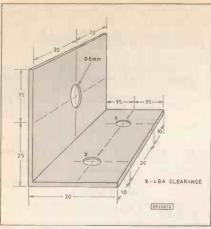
Dimensions of the aluminium mounting bracket for the mains suppressor SP1.
